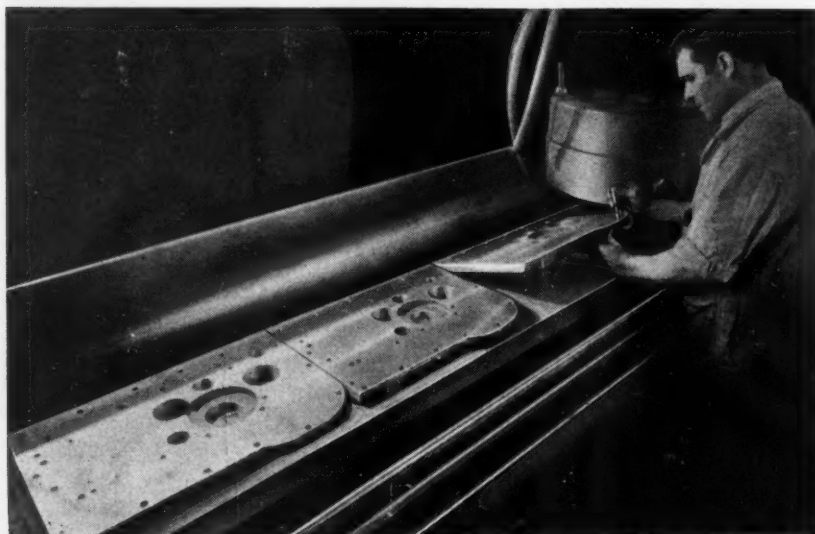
Machine Tool Covers being Ground on a Pratt & Whitney Machine
